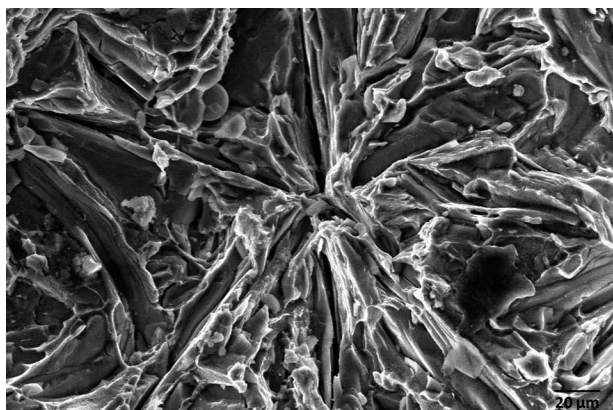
View of another location in the fracture surface shown in Fig. 242. The star shaped structure presented here is due to the solidification pattern and to the heat treatment imparted
